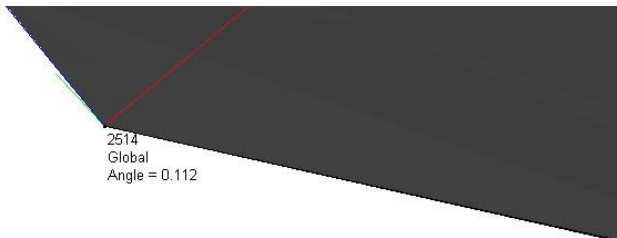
springback angle 0.112° for sheet thickness 3.4 mm
